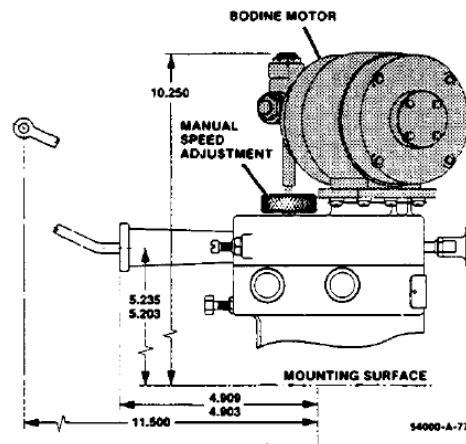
SG with Fuel Rod and Bodine Electric Motor for Speed Setting
